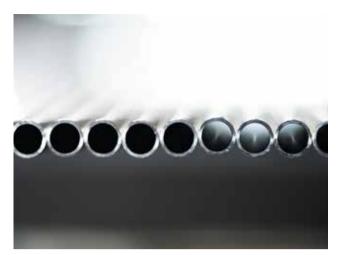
Automotive GDI Fuel Rail use Seamless Tube
